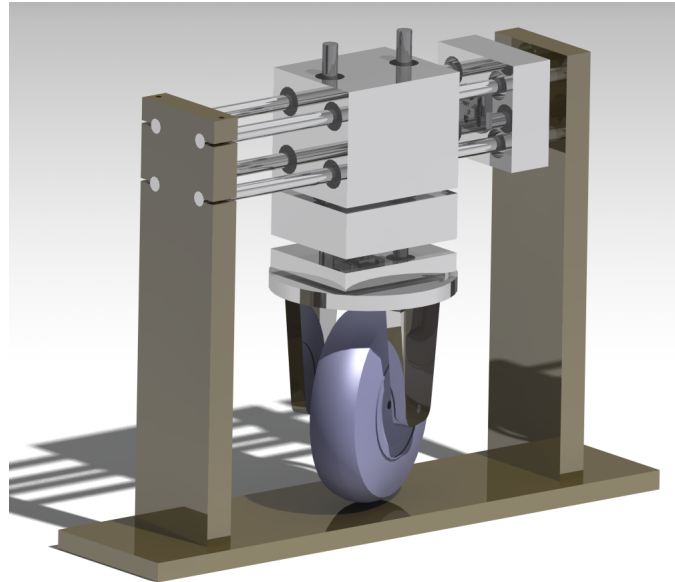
WATT CAD assembly*. Final CAD design of the Windsor Automotive Tire Tester. All design work was completed in CATIA<sup>®</sup>.
